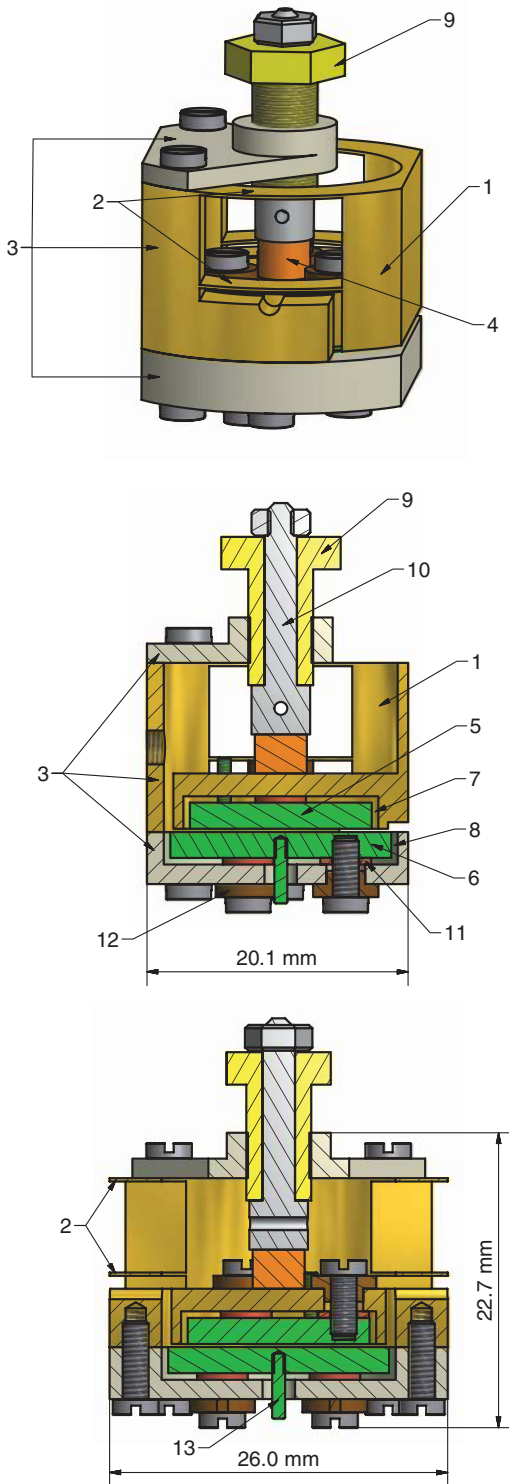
A schematic view of the capacitive dilatometer. The upper panel shows a 3D-view, the middle panel, a side cut-away view, and the lower panel, a front cut-away view of the cell. (1) movable part, (2) Be-Cu flat springs, (3) fixed outer cell frame, (4) sample, (5) upper capacitor plate, (6) lower capacitor plate, (7) upper guard ring, (8) lower guard ring, (9) adjustment screw, (10) piston, (11) sapphire washer, (12) insulating piece of vespel, and (13) electrical connection.
